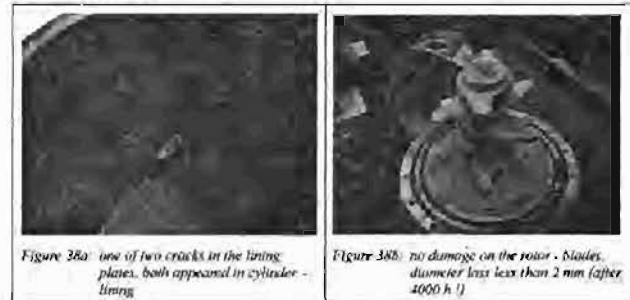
shows flange and rotor. No cracks or damage could be noticed in the flange-lining and most important, no damage or cracks could be found at the Si_3N_4 -bulk rotor-blades as well.
